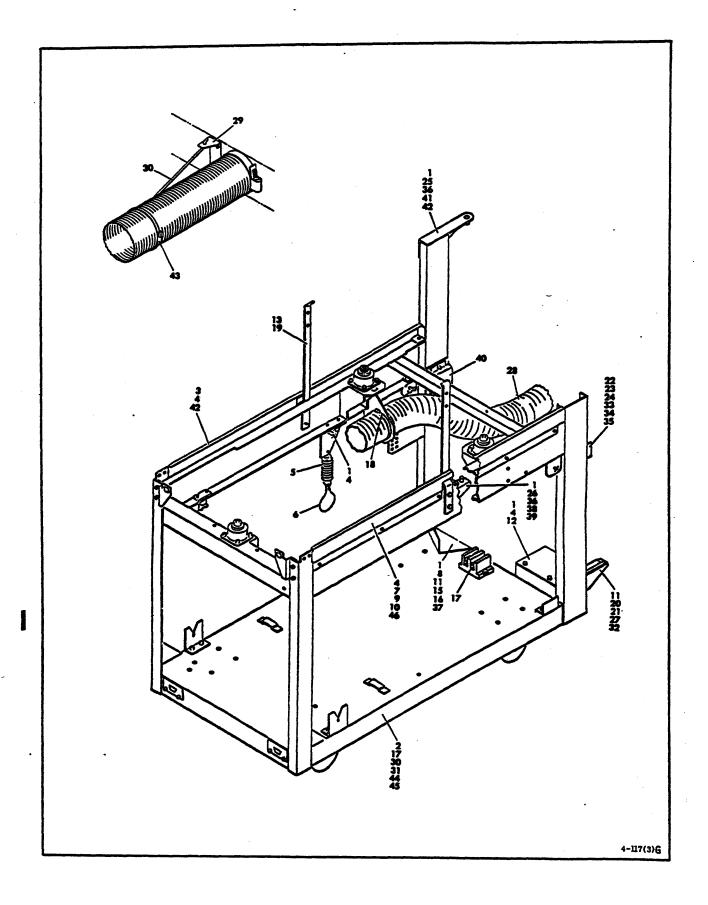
FINAL ASSEMBLY (SHEET 3)
